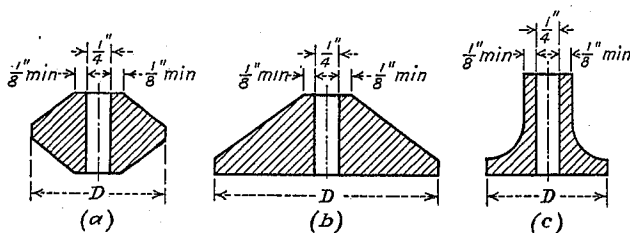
SOME ACCEPTABLE TYPES OF FILLER PLUGS FOR CLOSING TREPANDED HOLES
